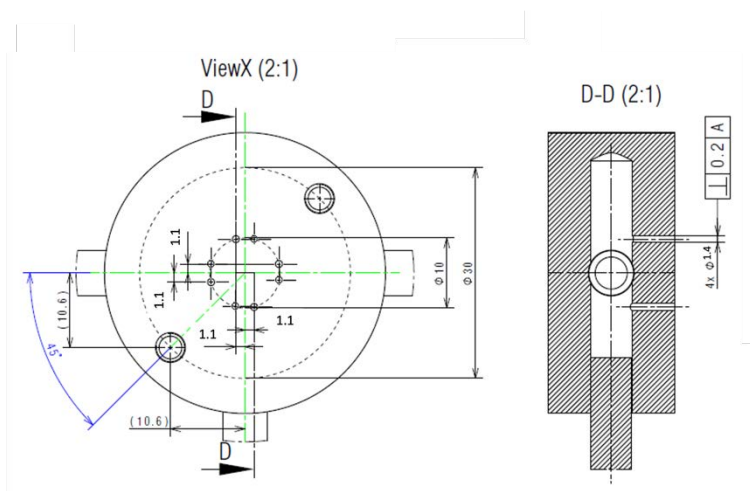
CAD design of gas manifolds with eight gas ports for SOFC button cells (Design 2).
